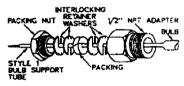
Part Number FTG13A-600R packing nut assembly. (Use with Style 1 bulb with support tube for direct immersion applications.)
